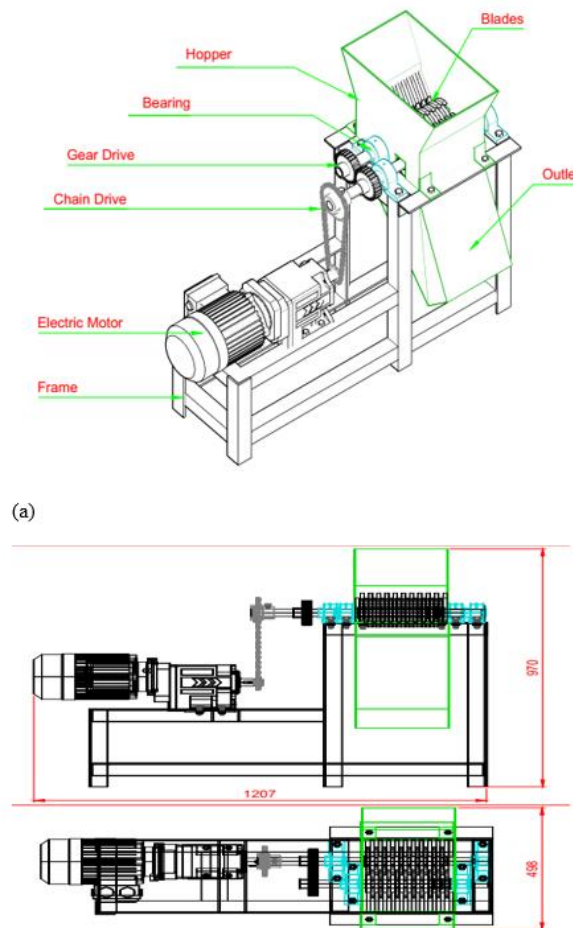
Concept 2 (a) Isometric View (b) Orthographic views
